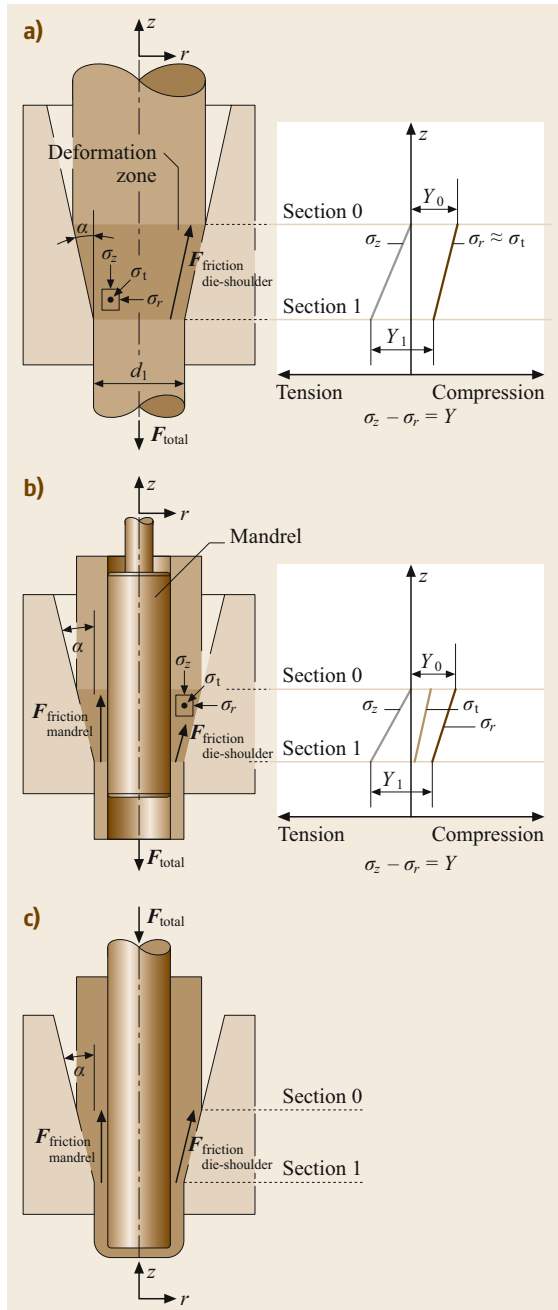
c Principles of typical drawing processes: (a) wire drawing, (b) tube drawing, (c) ironing
